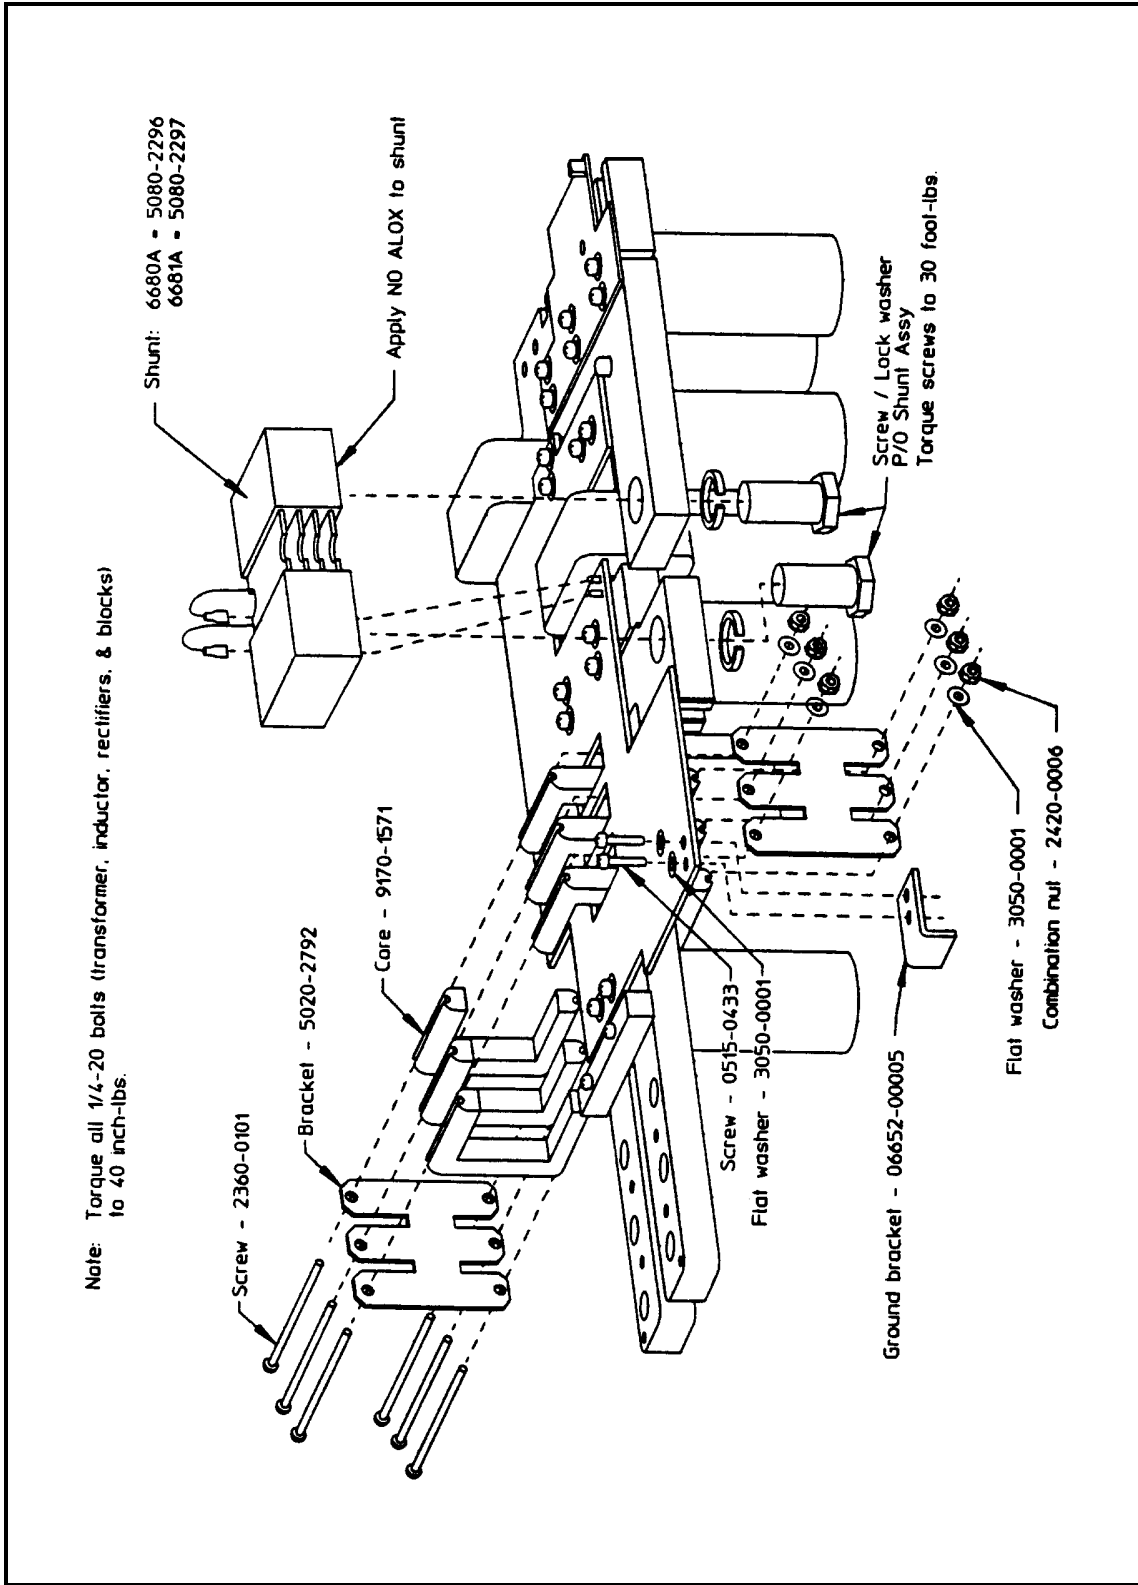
Assembly A10, Exploded View (6680A, 6681A)
